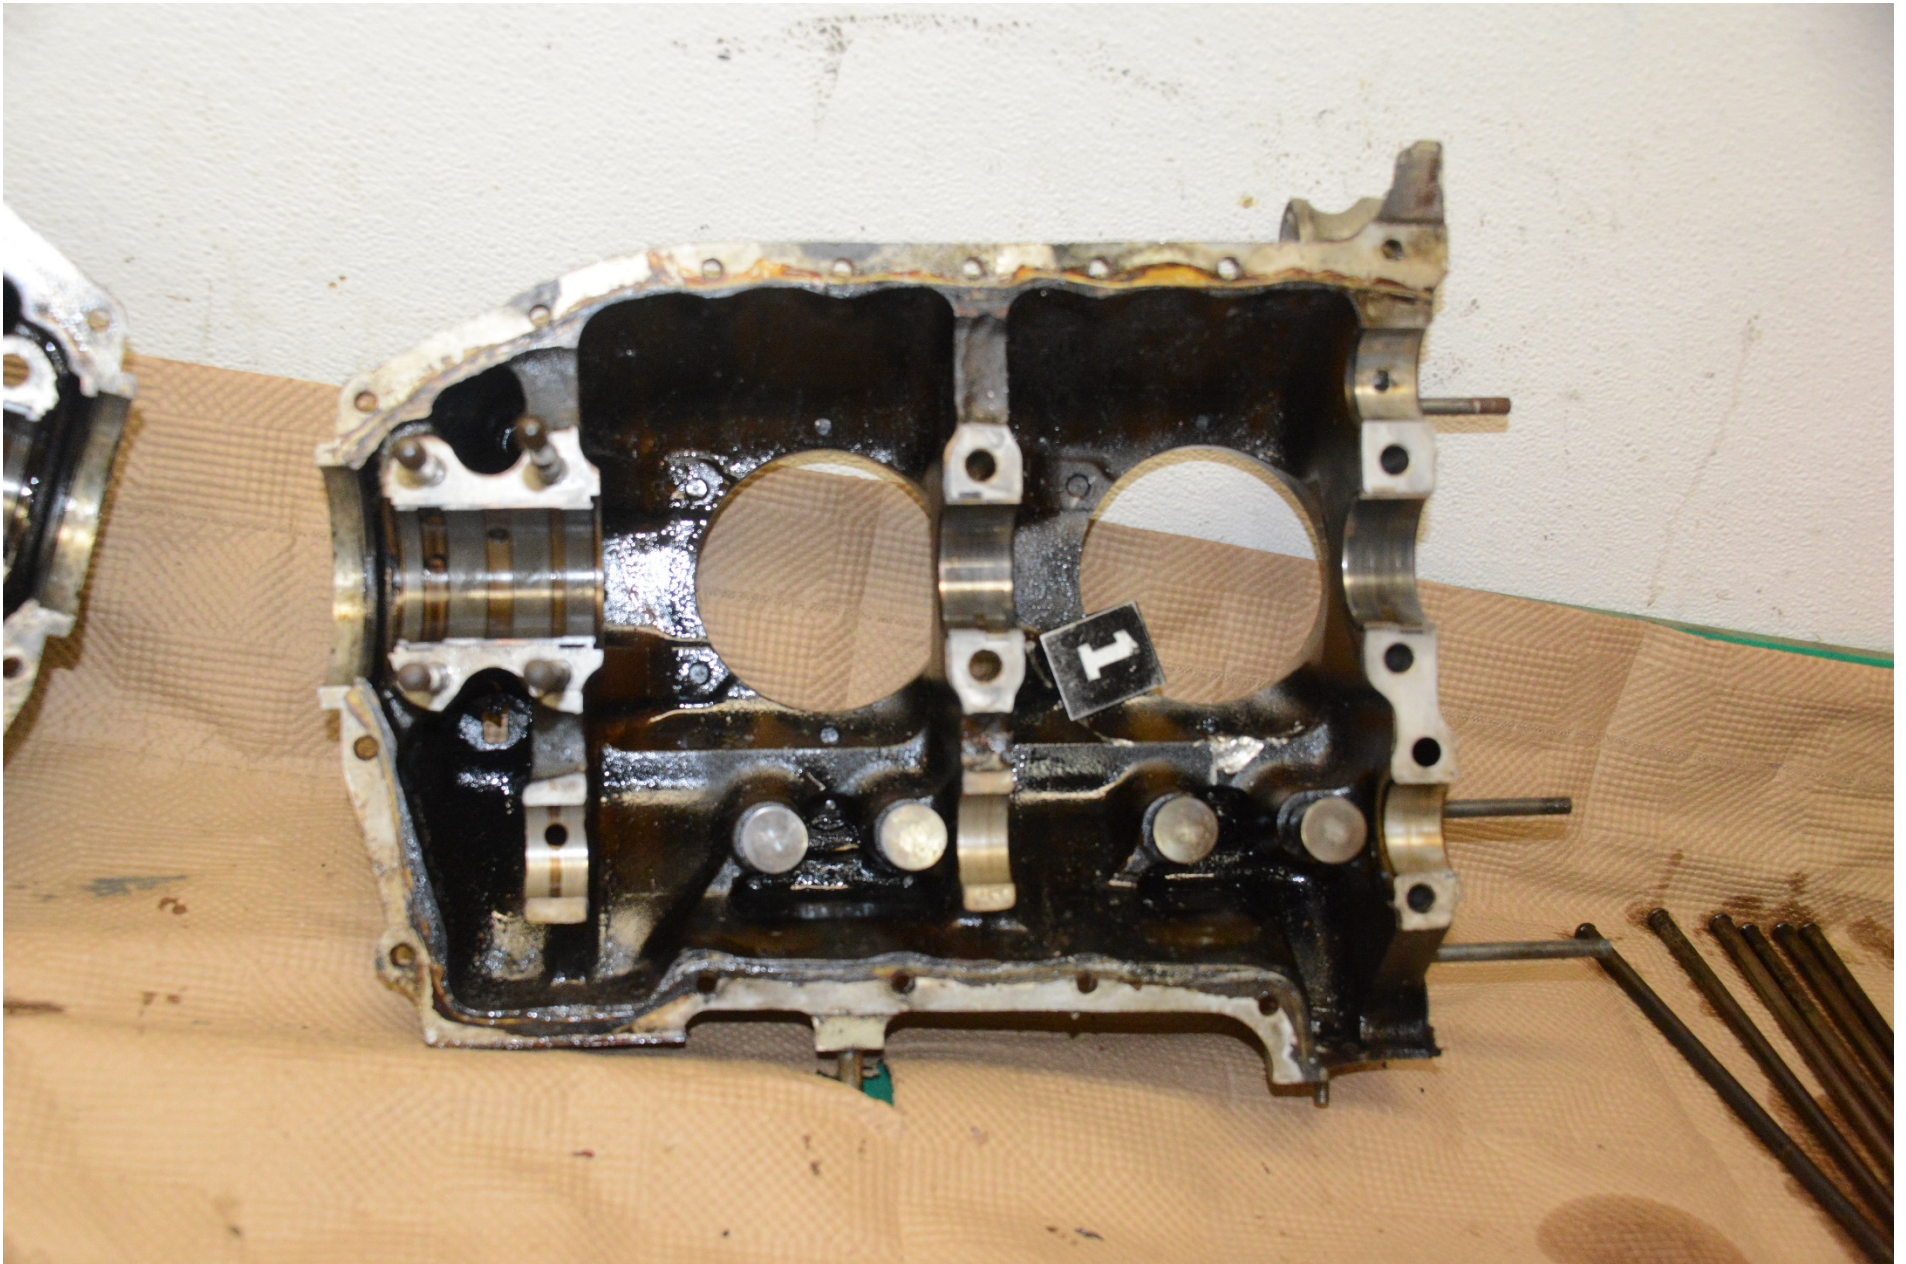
View of the other half of the crankcase. The crankcase exhibits a witness mark between the No. 1 cylinder opening and its lifter assemblies.
